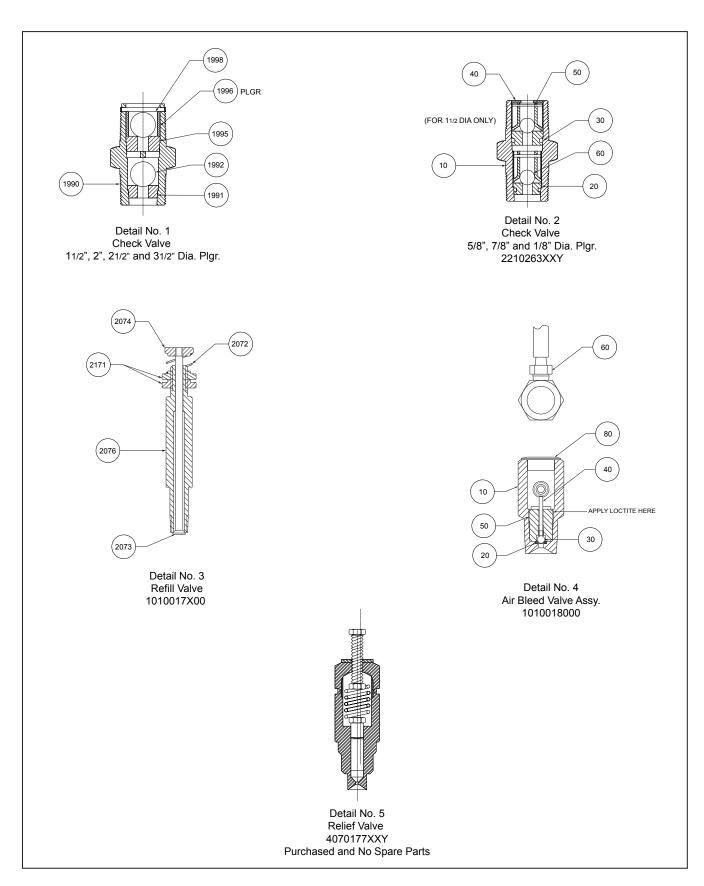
MILROYAL® C Disc Diaphragm Liquid End Assembly Drawing Continued (C-102-2285-0006)
